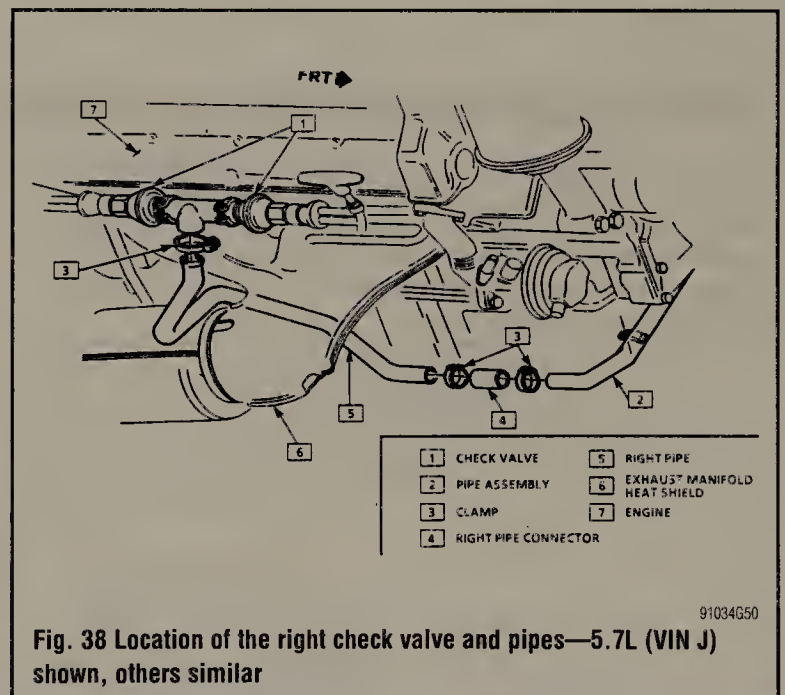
Location of the right check valve and pipes—5.7L (VIN J) shown, others similar
